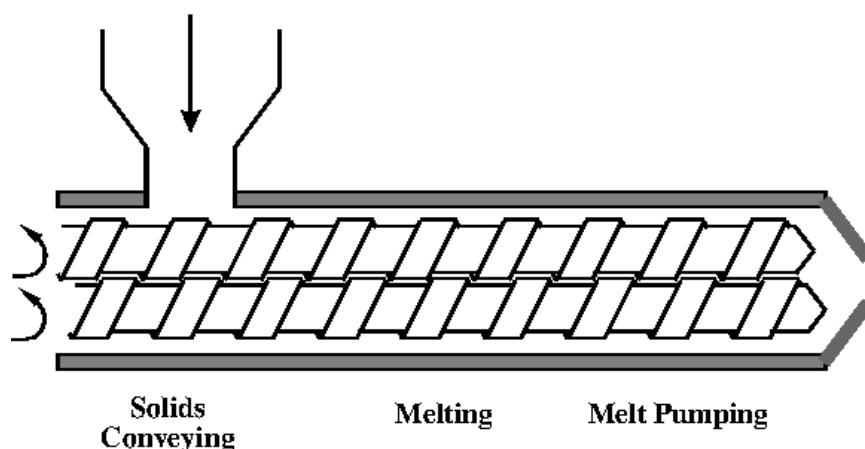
Scheme of a co-rotating twin-screwed extruder machine [11]
